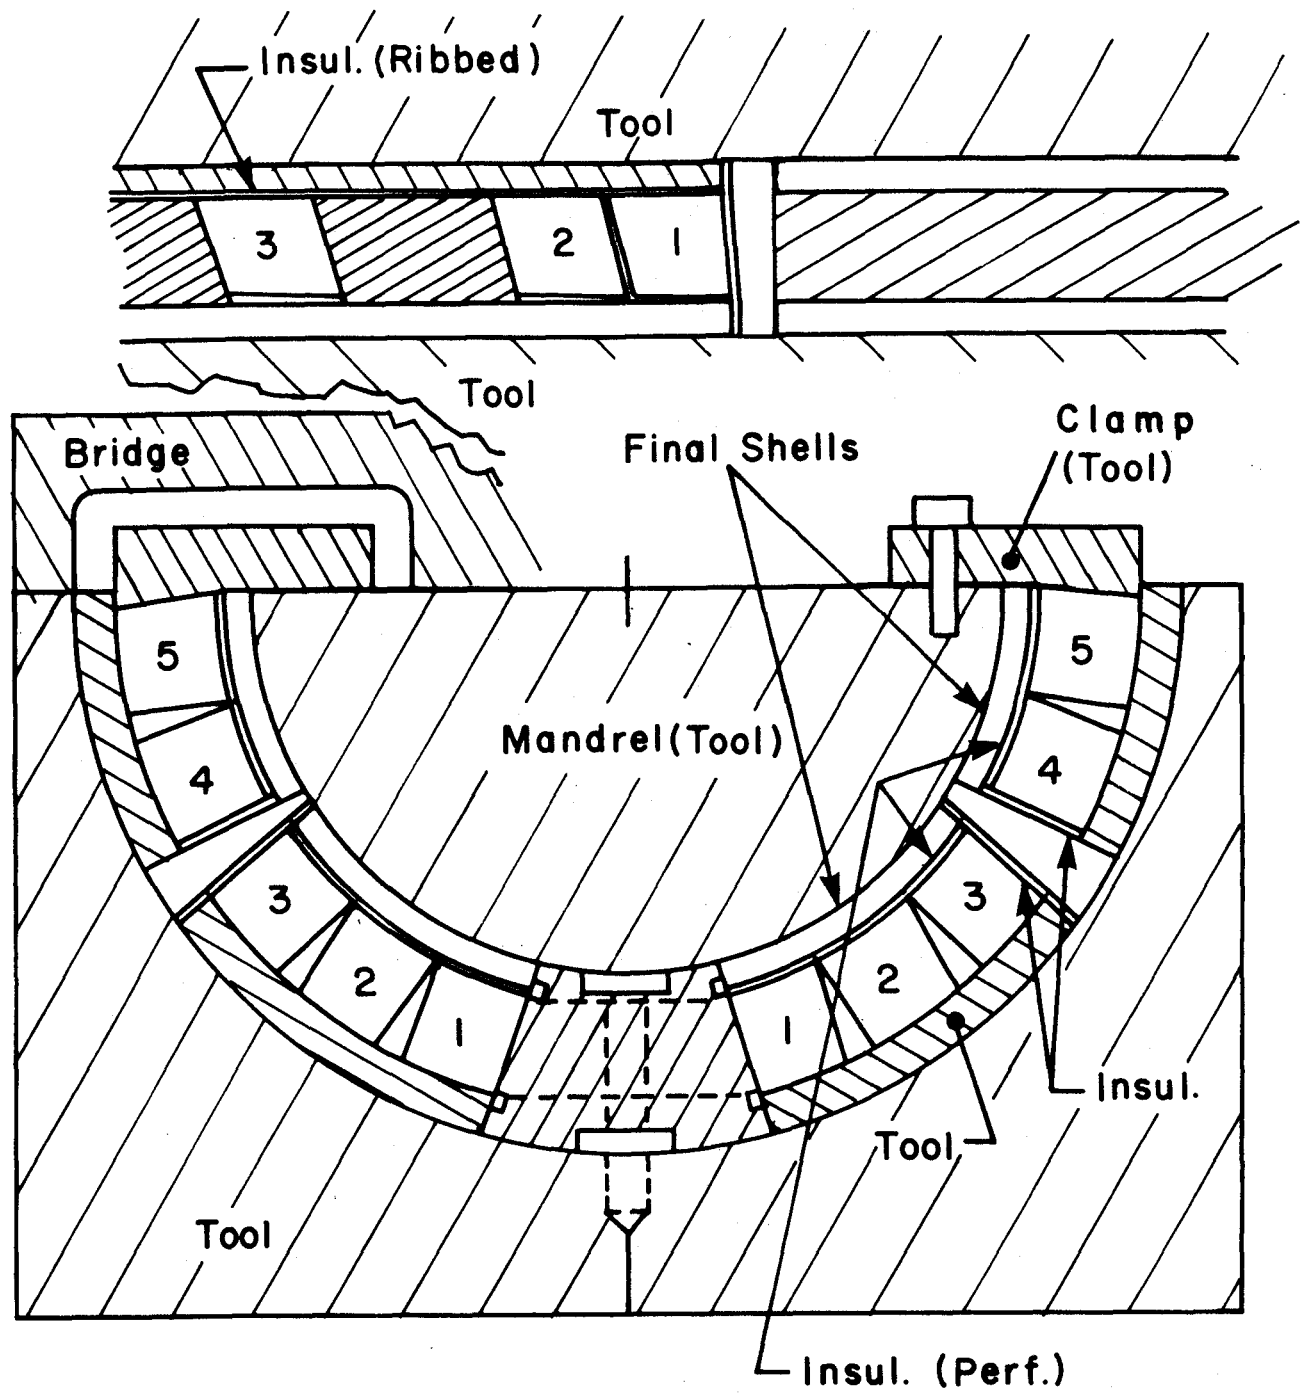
Coil Half (5 Blocks) After Curing, with Inner Guide Removed, Insulation and Inner Shells Installed
